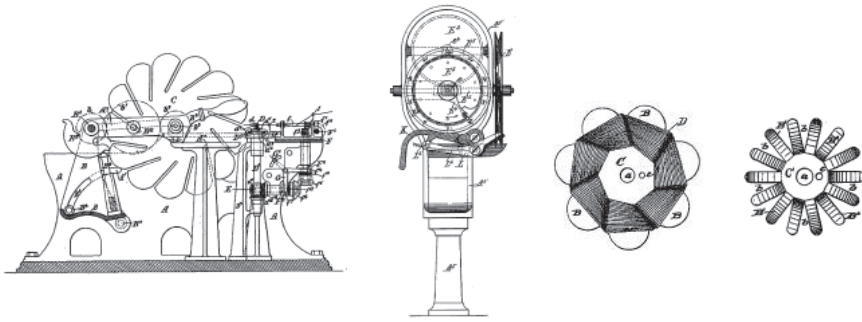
Keats' winding machine, 1887, its cutting mechanism, and two of his star-shaped holders.
